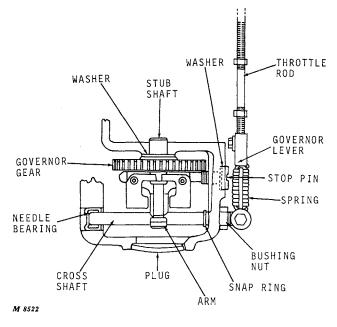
Cross-Section of Governor Assembly (K241AS Engine)
